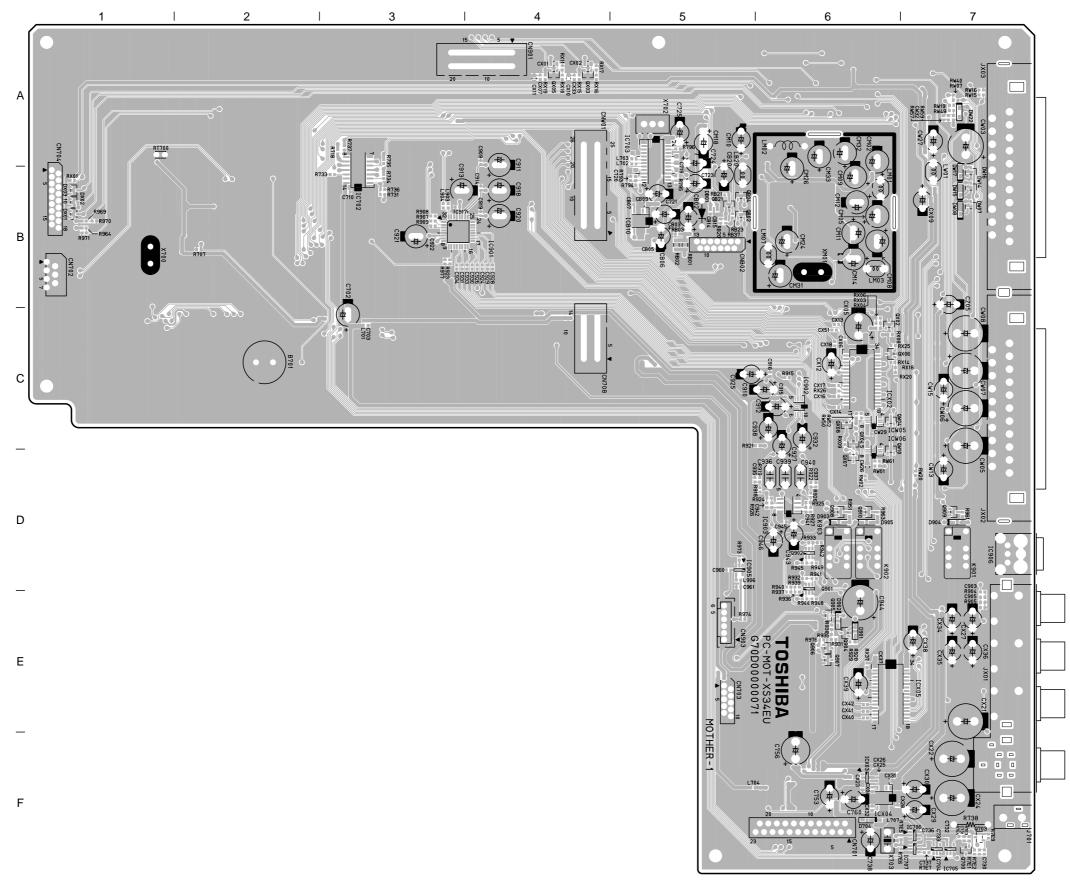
EU05 Mother PC Board (Top side)
